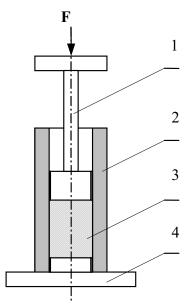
Scheme of the closed compression die assembly: 1 piston, 2 cylinder, 3 compacted material, 4 base [12].
